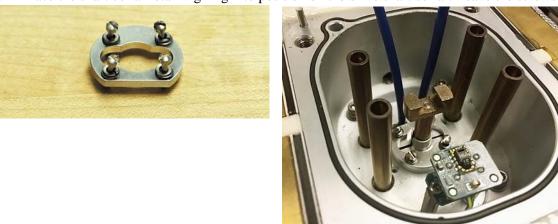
Left: Shaft collar retaining ring; Right: Shaft collar retaining ring in place.
